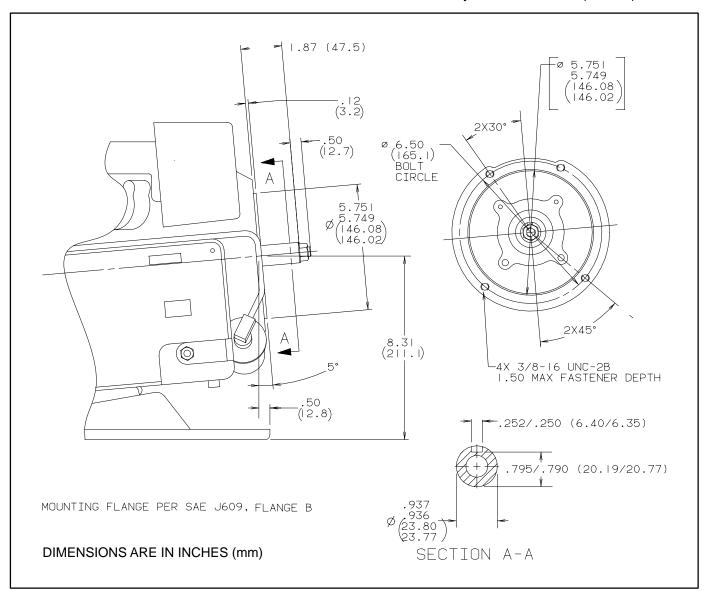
DETAILS OF THE EXTENDED SHAFT AND FLANGE
